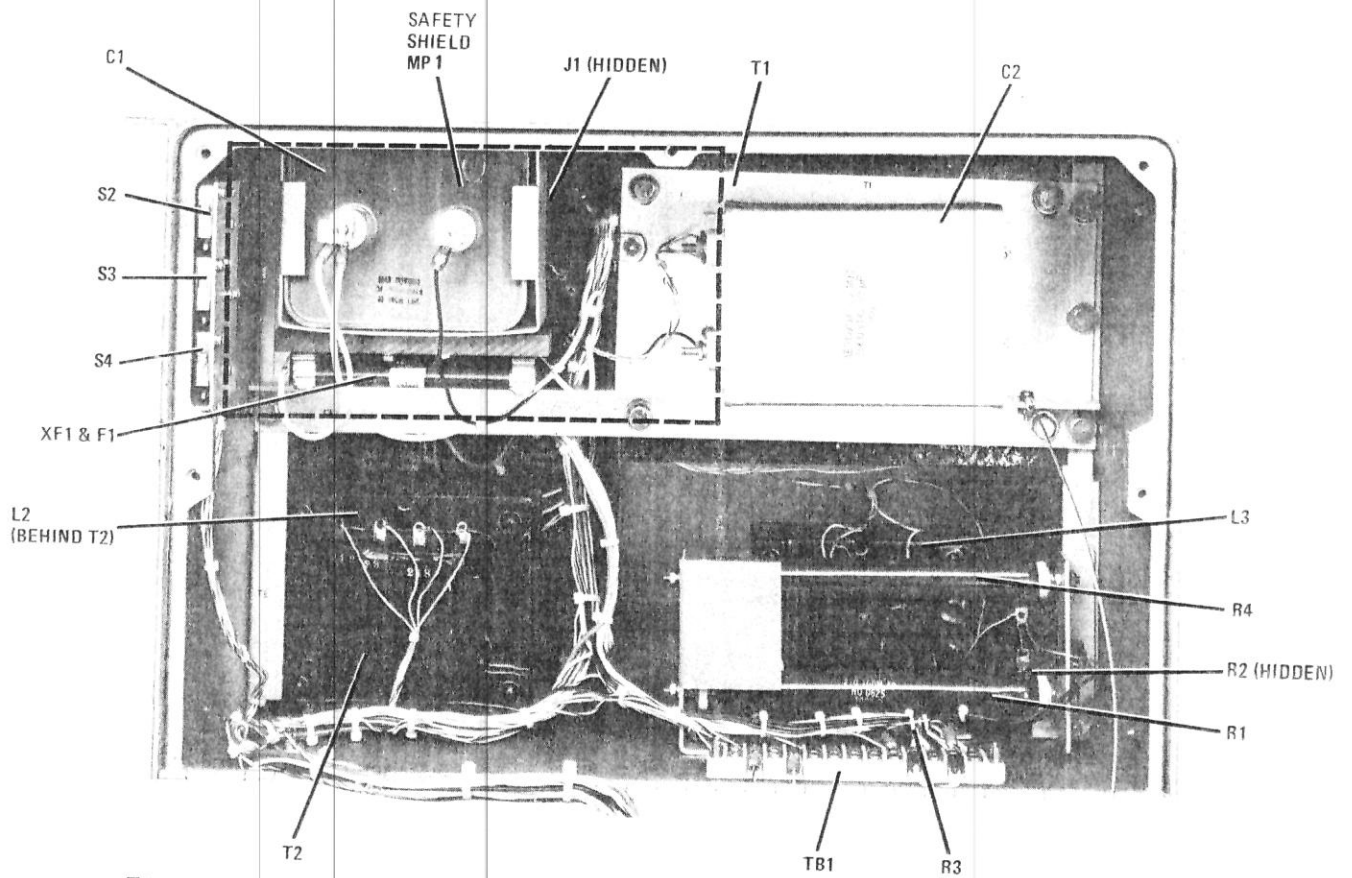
Case Assembly, Component Locations (Units with SN-0650 or Over)
